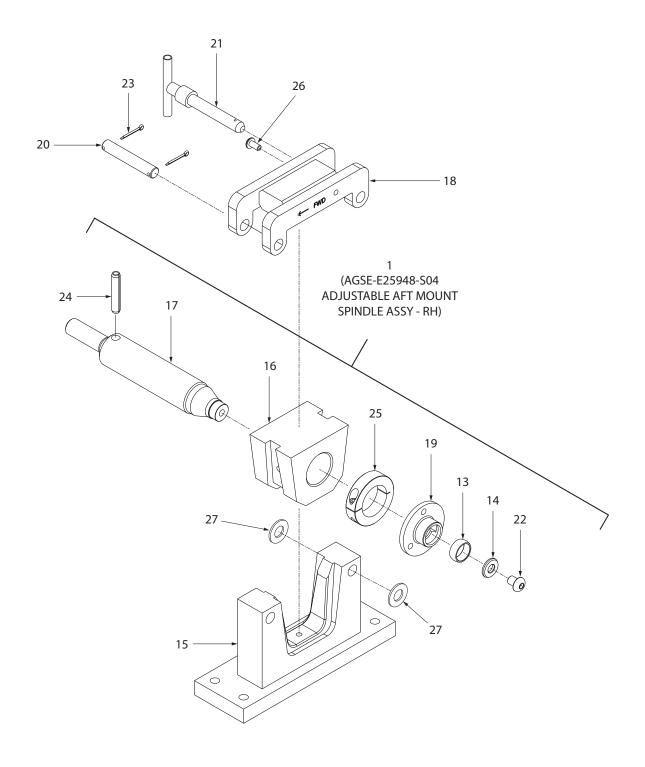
AGSE-E25948-S02 Adjustable AFT Mount Assembly - RH
